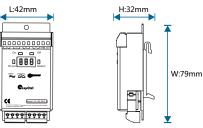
Dimensional Drawing - Front View Figure 3. Dimensional Drawing -Sideview
